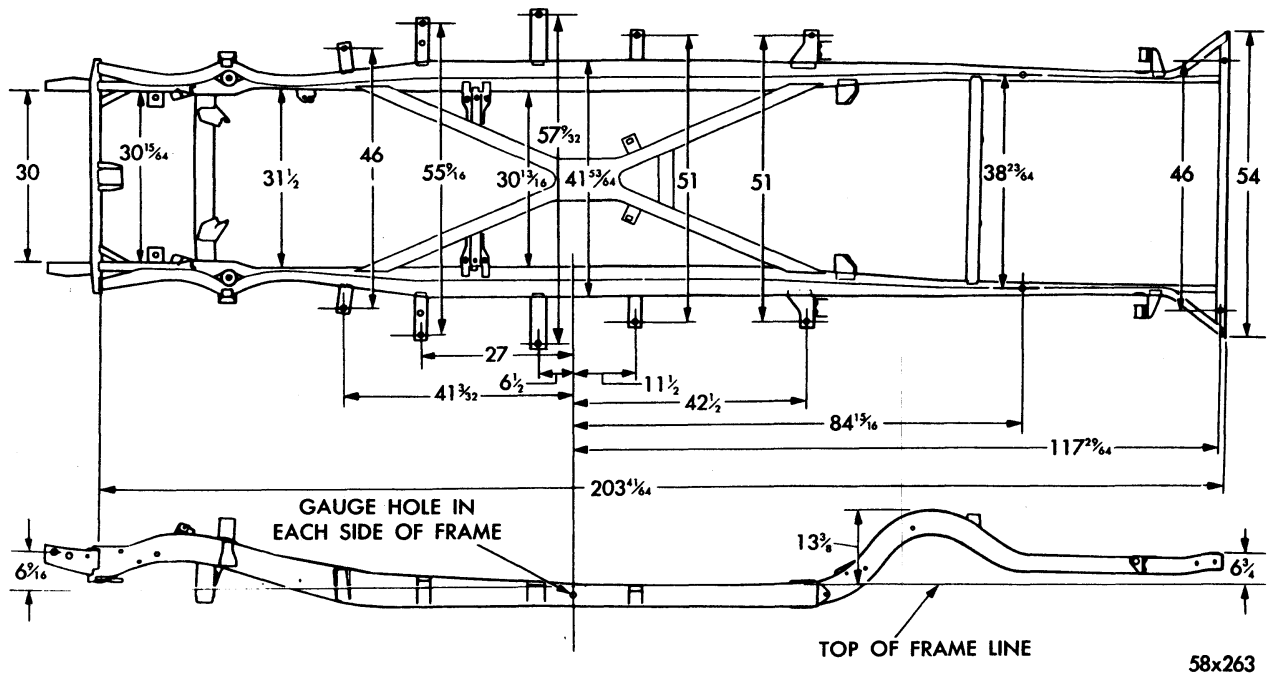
Frame Dimensions—Imperial, 4-Door H.T. and Convertible
